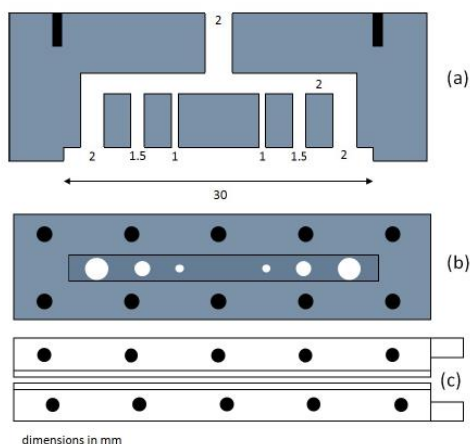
Schematic of a single pulsed nozzle used in the jet expansion. (a) the internal nozzle chambers, (b) bottom view of channel block, (c) bottom view of adjustable block plates
